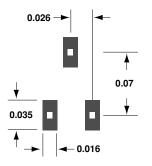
PCB Pad Layout, SOT-323. (dimensions in inches).
